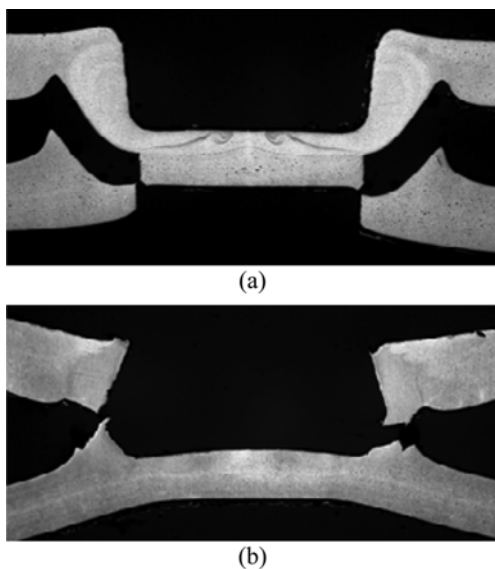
Cross sectional macrographs showing crack propagation in the cross-tension test for (a) cylindrical pin (weld strength: 1,800N) and (b) triangular pin (weld strength: 3,600N) [18].
